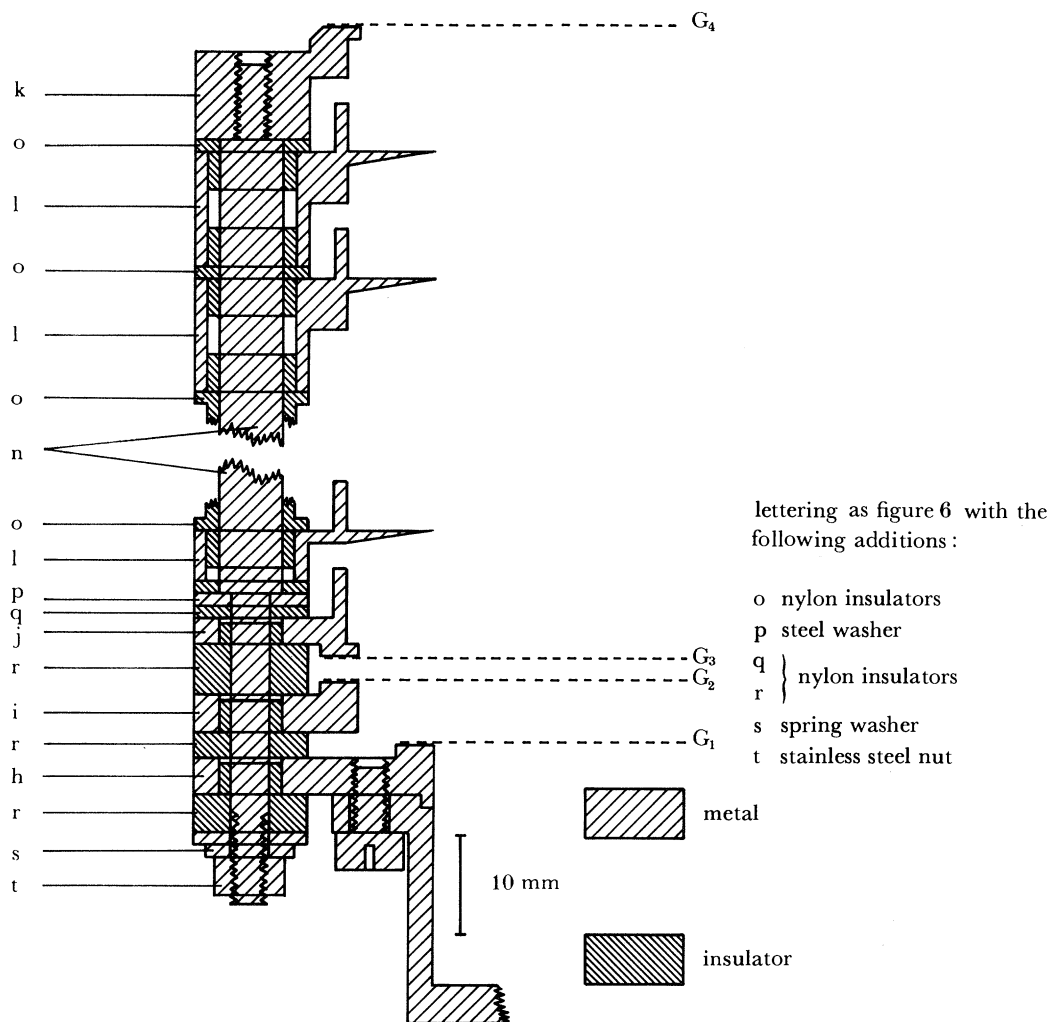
Radial section through outer rim of the assembled electrode structure. The structure is designed so that its axial thermal contraction will be very closely equal to that of the stainless steel mounting rod, n.
